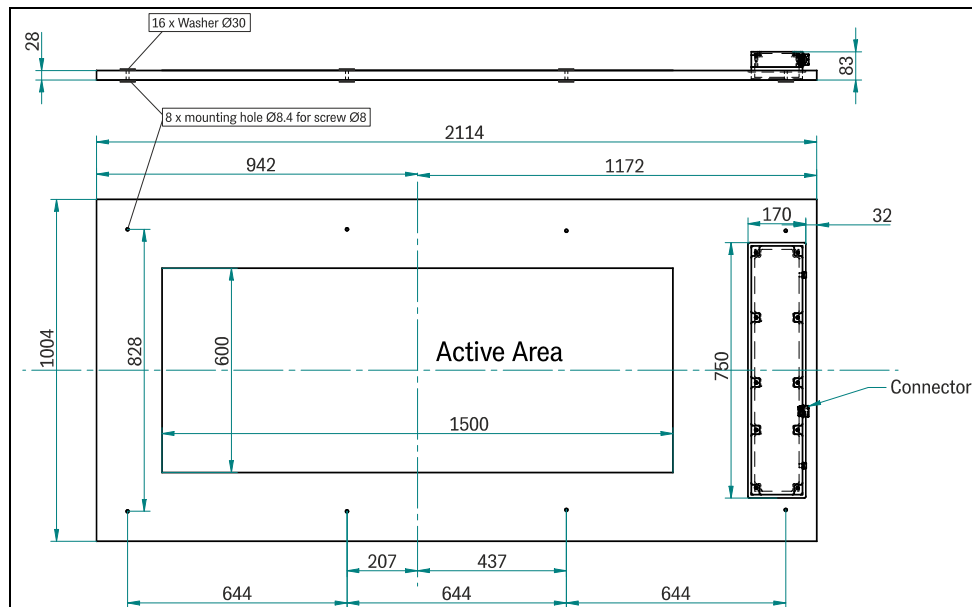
Drawing Antenna HG 98860ZA (with casing dimensions)
